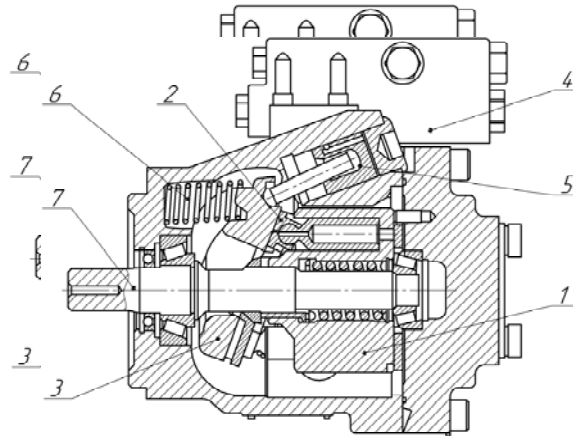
The design of the variable displacement axial piston pump PVC 1.85
